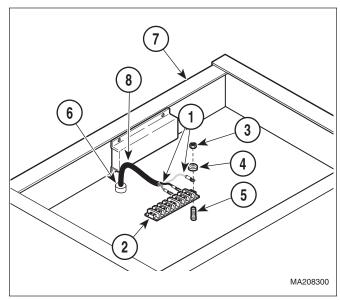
Disconnecting / Connecting Vacuum Pump Assembly Wire Harness
